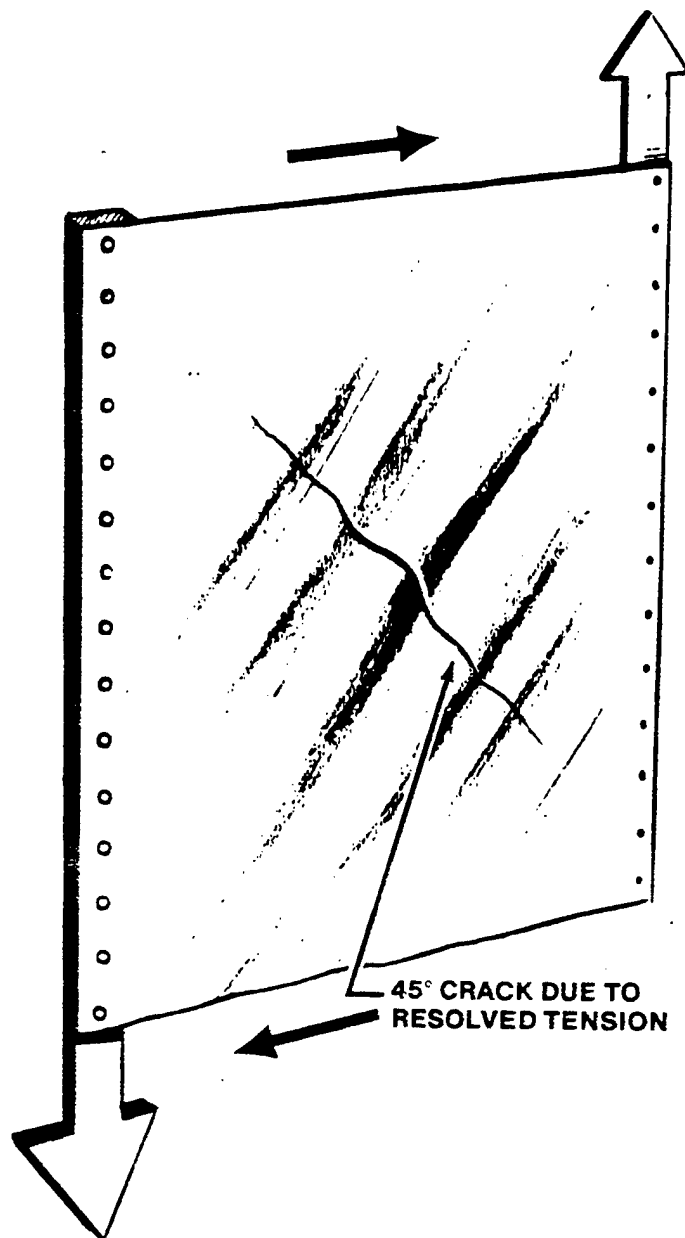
SHEAR IN PANELS TENSION TYPE FAILURE
